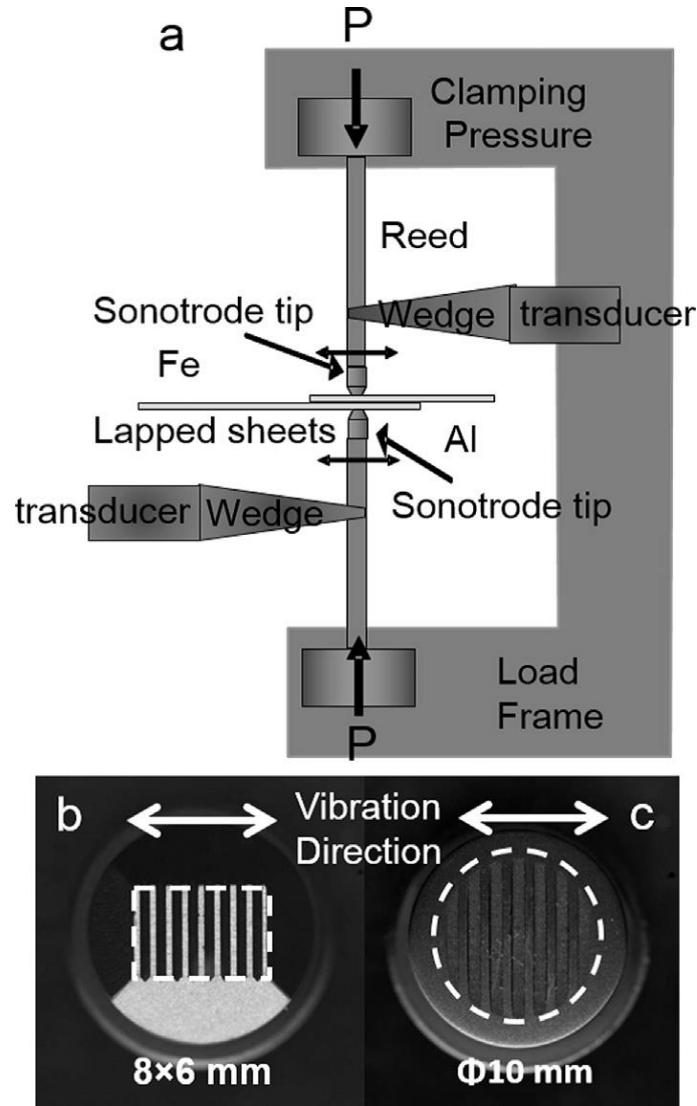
(a) schematic demonstration of ultrasonic spot welding, (b) flat serrated sonotrode tip touching aluminium and (c) domed shaped serrated bottom sonotrode tip touching steel [17].
